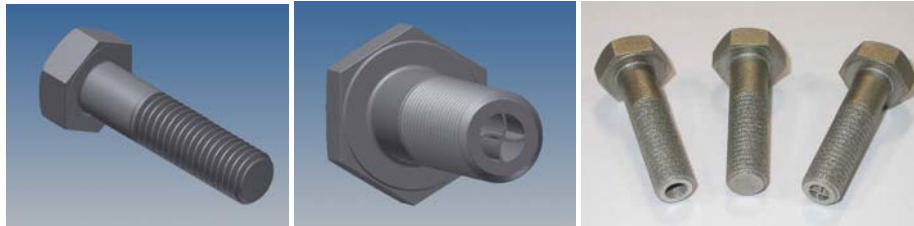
Hexalobular bolts: CAD models and manufactured parts
